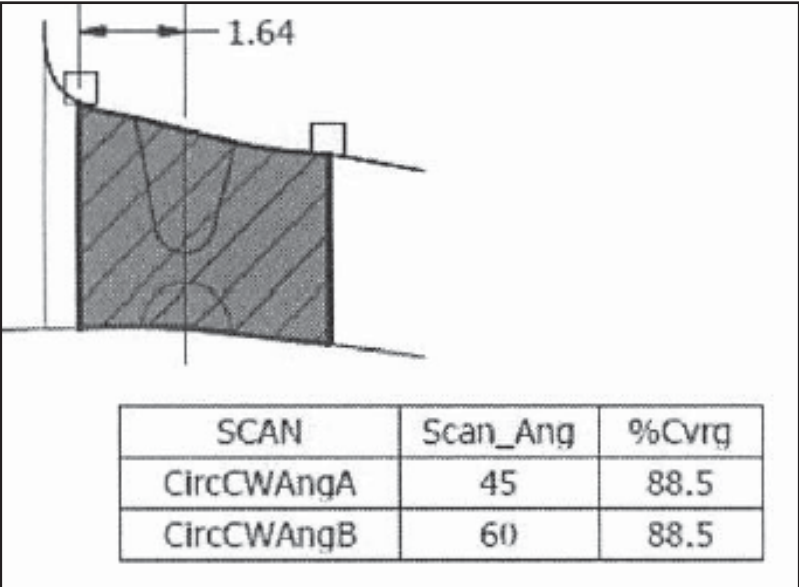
Weld RCW-15, 45° & 60° CW Circumferential Scans
